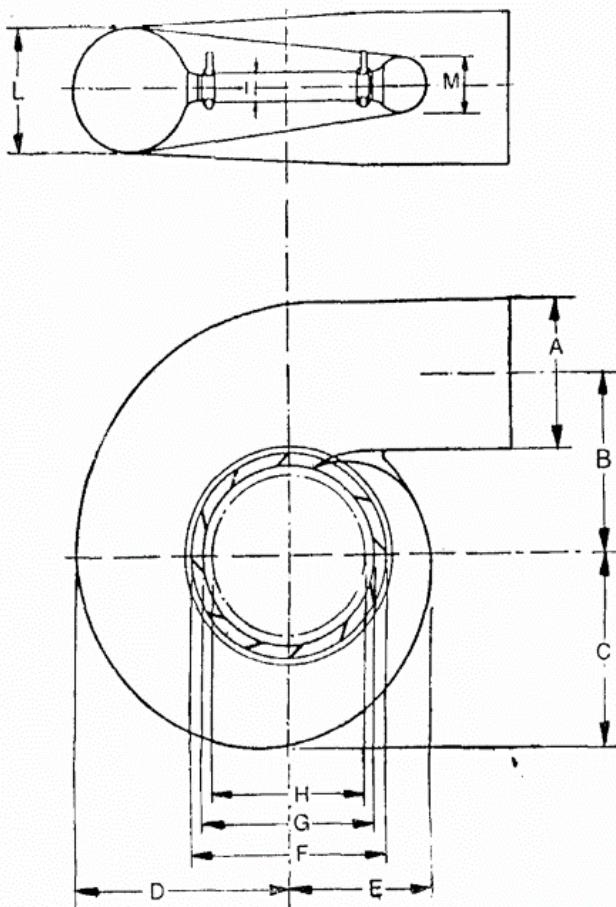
MAJOR DIMENSIONS OF THE SPIRAL CASING
